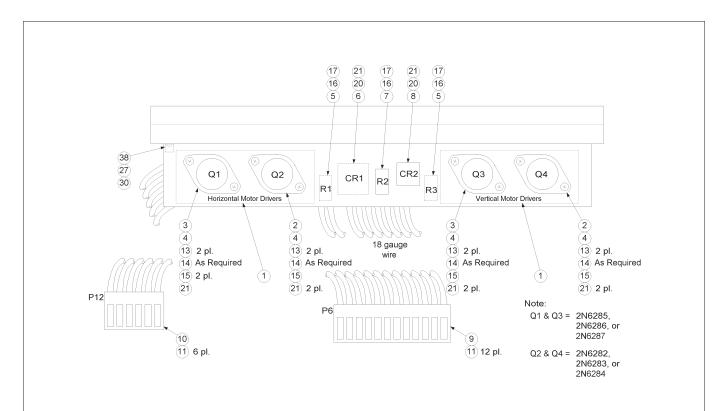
MOTOR DRIVER HEATSINK ASSEMBLY EXPLODED VIEW
